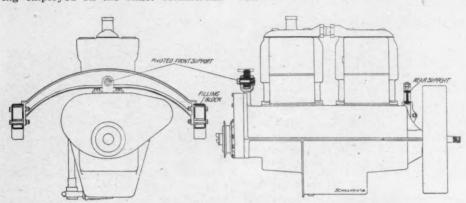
A Three-Point Main Frame Mounting Employed on Riker Trucks
